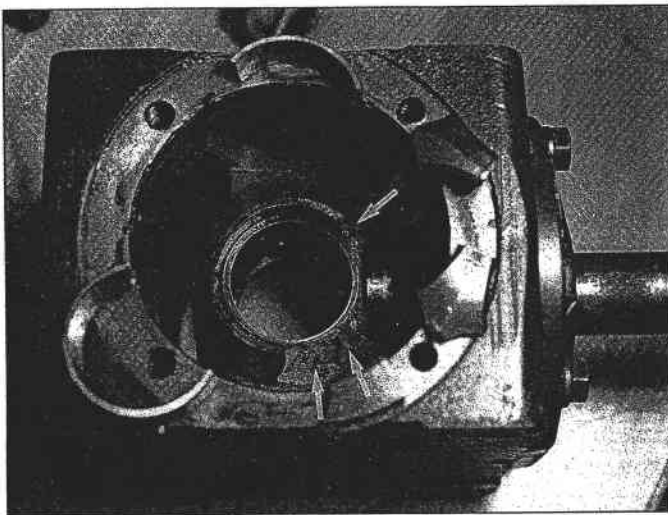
Exemplar gear box - fractured input inboard bearing support after compression loading. Arrows indicate typical fracture surface.
